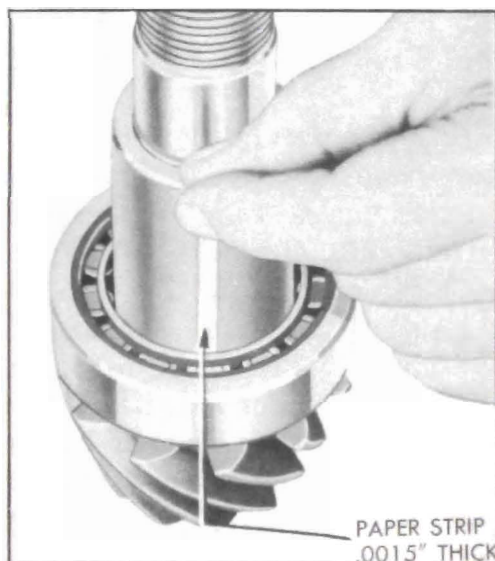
Checking Clearance Between Pinion and Roller Bearing
